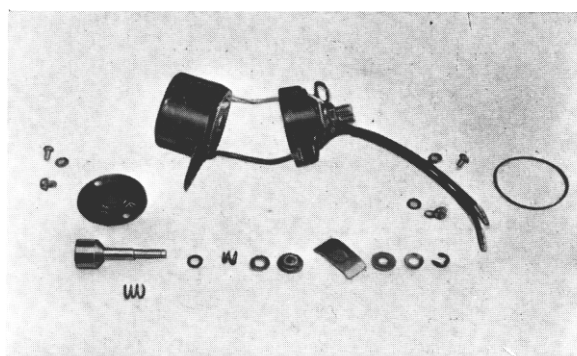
Disassembly of magnetic switch (assemble part)
